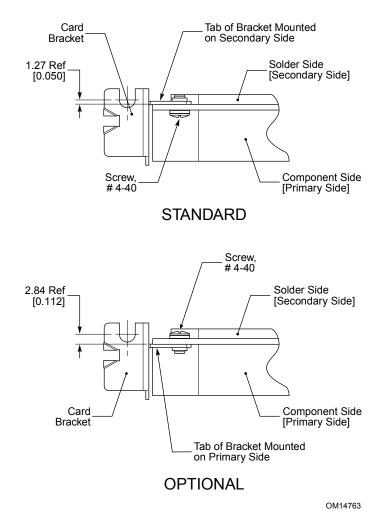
Bracket Design with the Mounting Tabs Mounted on the Primary Side of the Add-in Card
